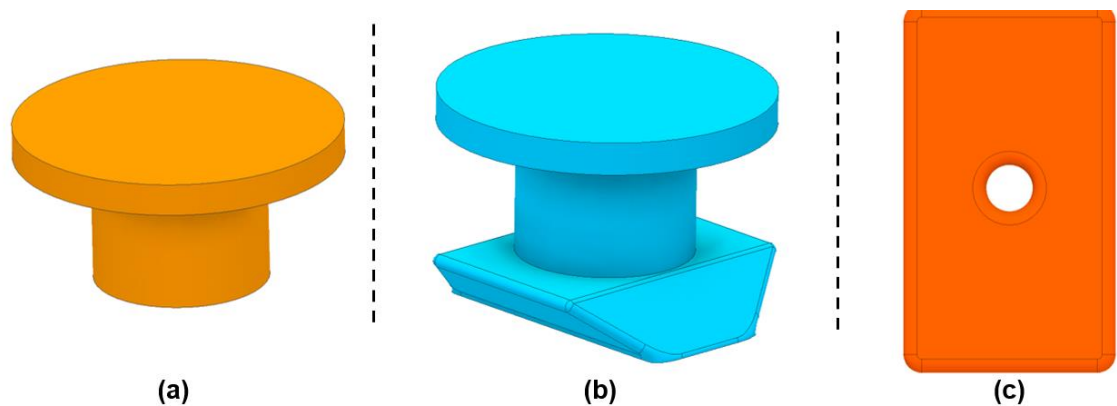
Modified CAD model used for FEA simulation. (a) Bottom end cap without the sawtooth grooves. (b) Top end cap without the sawtooth grooves and air inlet hole. (c) Simplified support rib.
